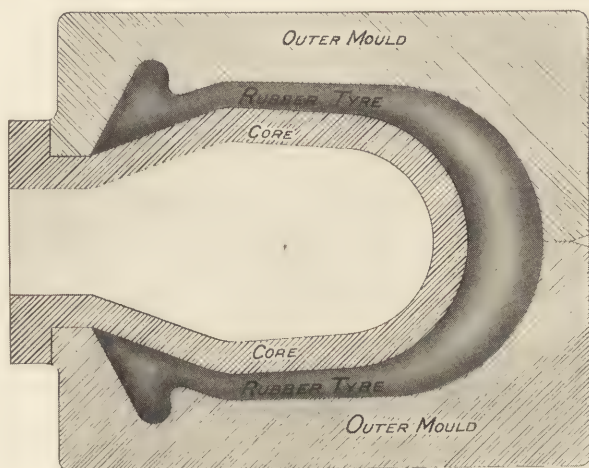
SECTION THROUGH IRON MOULD SHOWING PNEUMATIC MOTOR TYRE DURING VULCANIZATION.
